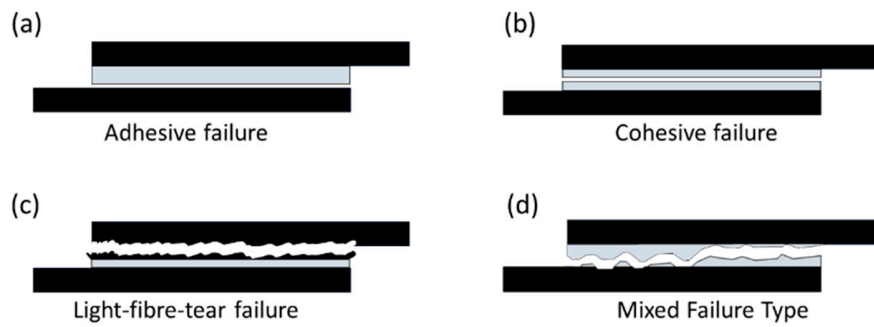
Schematic of the typical failure mechanisms occurring in adhesively bonded joints: (a) adhesive failure, (b) cohesive failure, (c) light-fibre-tear failure and (d) a mixed failure type.
